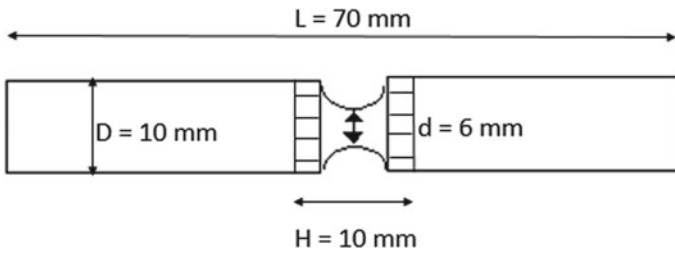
Schematic geometry of notched tensile specimen having 6 mm diameter in the notch
